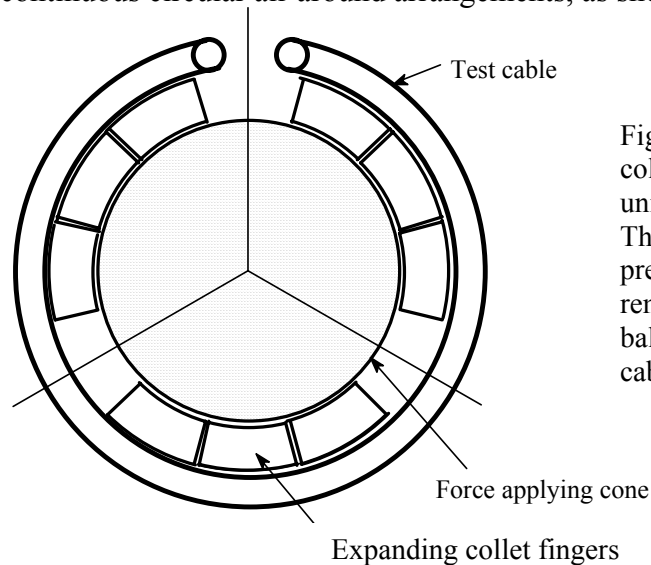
Modified expanding collet to apply a more uniform load on the cable. The fingers used to apply pressure on the cable will be removed in two sections to balance the section where the cable is missing.
